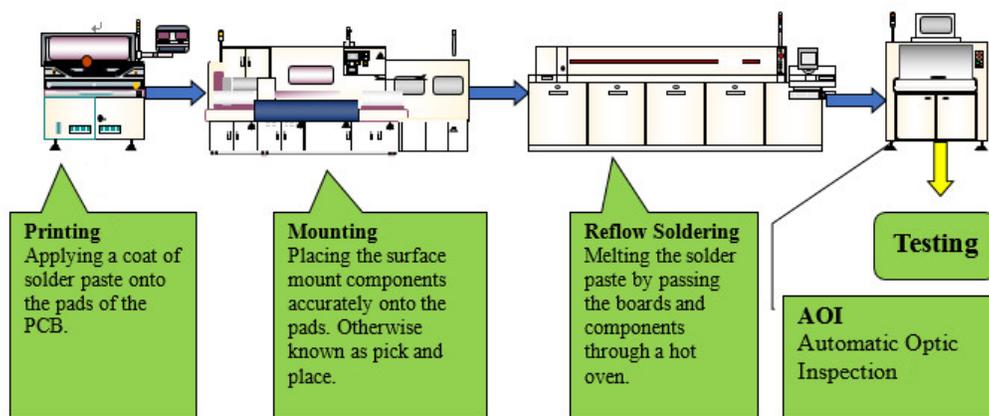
Surface mount technology manufacturing steps. From [Seed Tech.-17]
